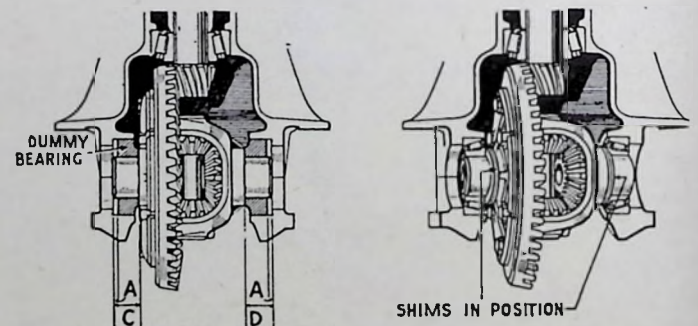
Adjustment of the crownwheel and differential box bearings.
